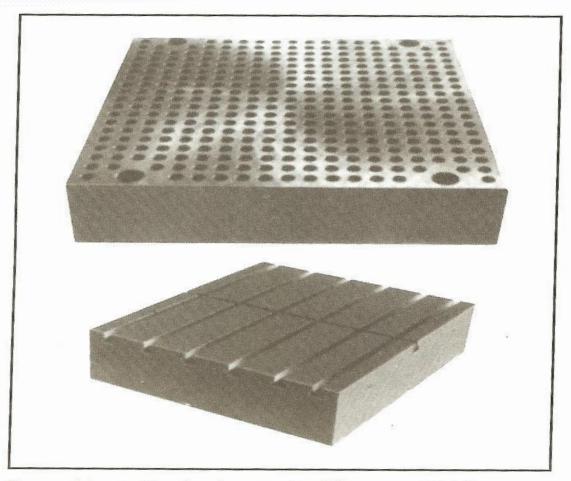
Riser/tooling blocks. (Courtesy Mid-State Machine Products)
